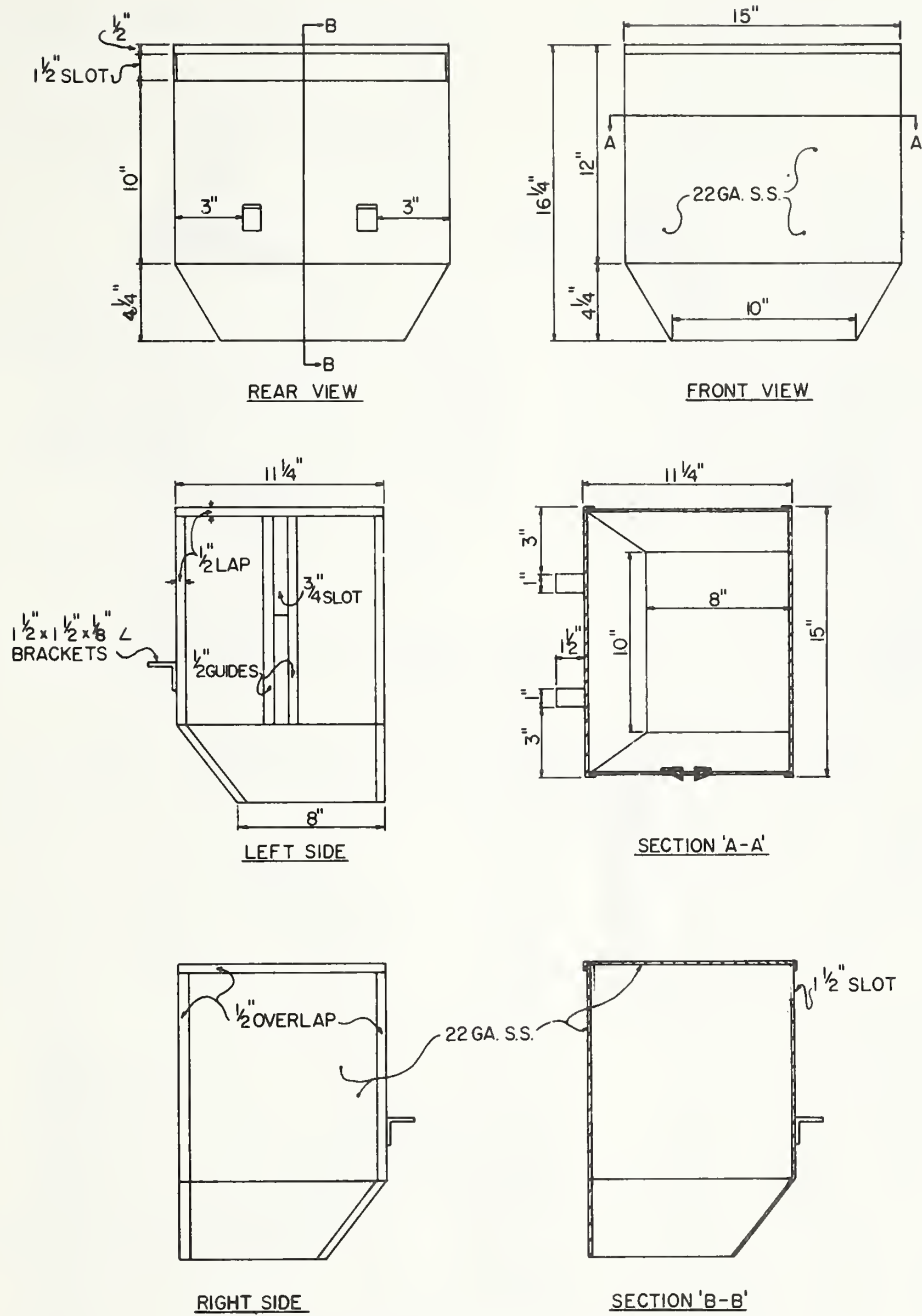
Details of pellet-machine cutoff drum shield.
